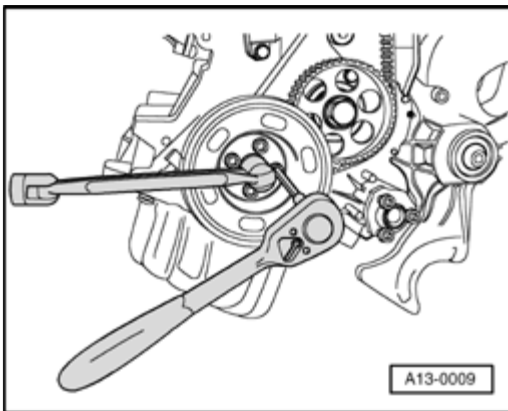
Removing/Installing Vibration Damper/Belt Pulley
